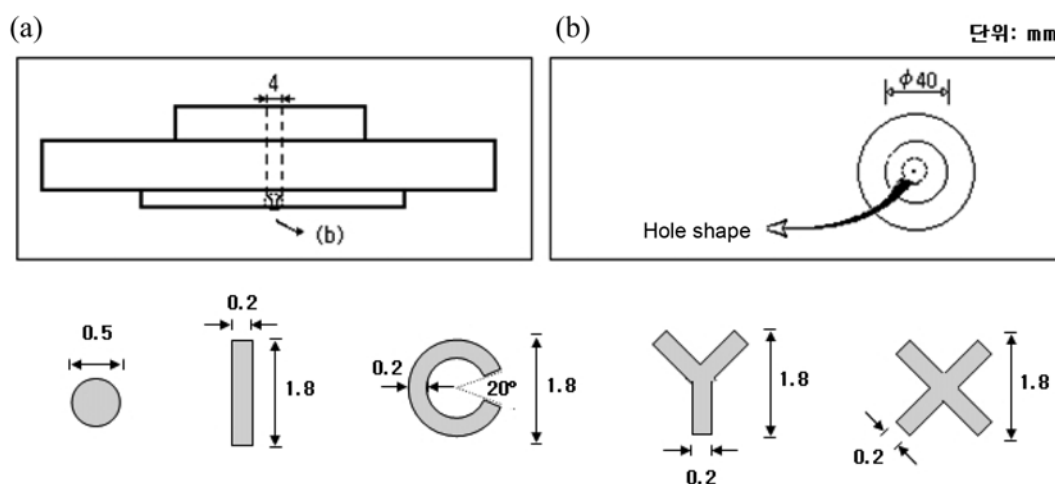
Dimension of differently shaped spinnerets; (a) a front view, (b) a plane figure.
